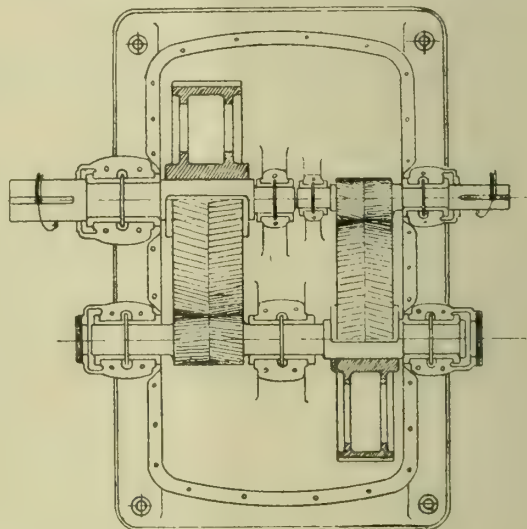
DOUBLE REDUCING GEAR LIGHT TYPE.
